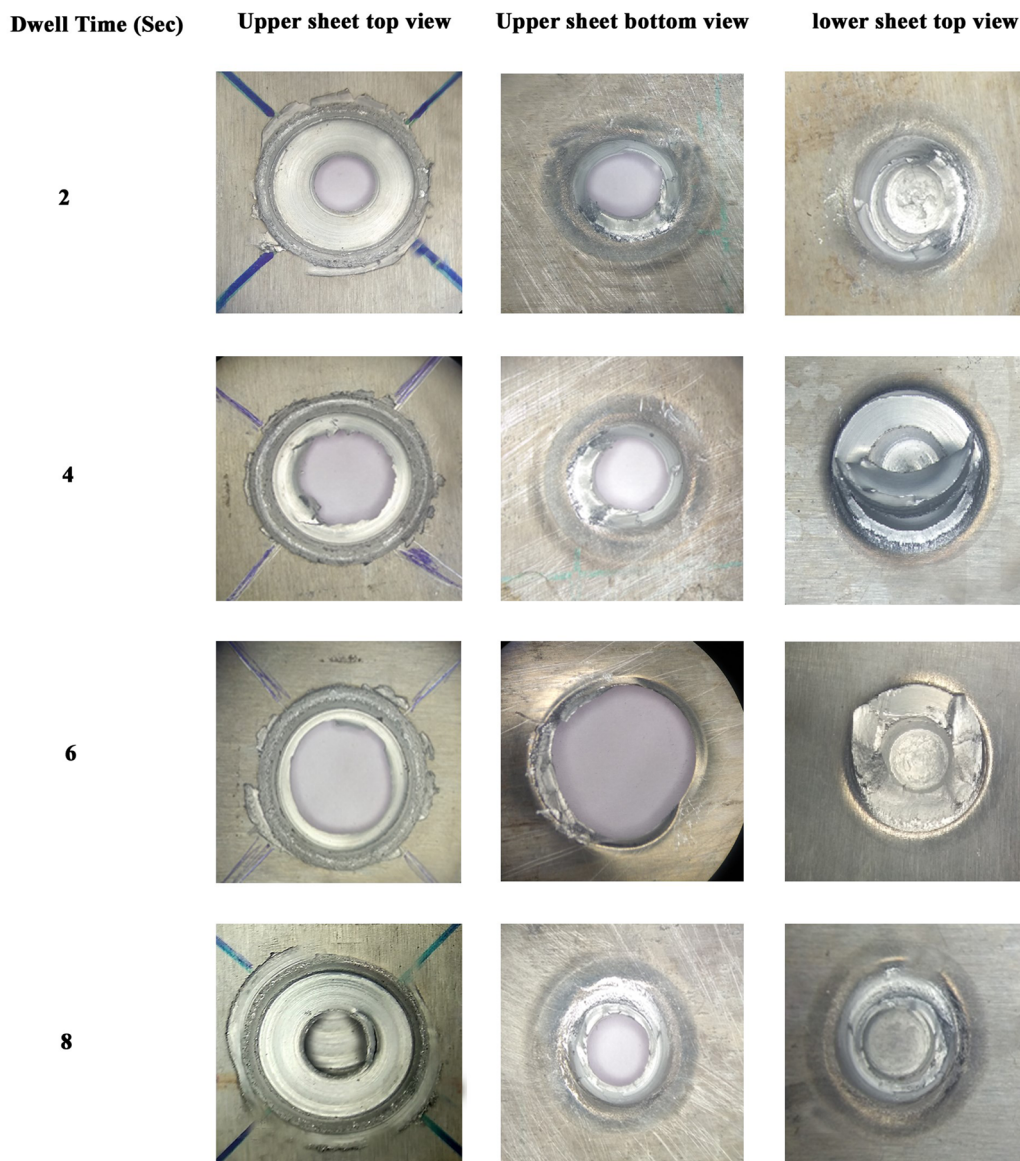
Fracture surfaces of lap shear tested specimens.
